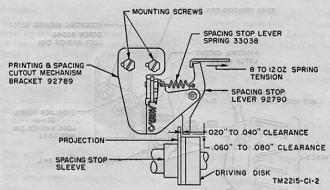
(Added) Printing and spacing cutout mechanism bracket.
